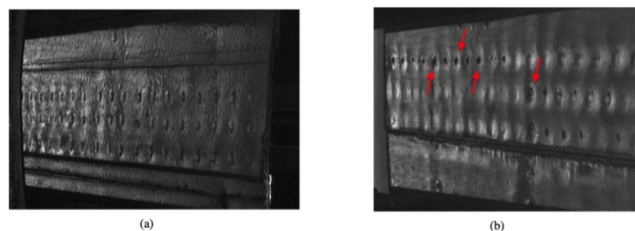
| Two samples taken with the DAIS 250c device of a simple shear lap joint. (a) An image with no corrosion and (b) the corrosion pillowing affecting rivets in red colour [124].
